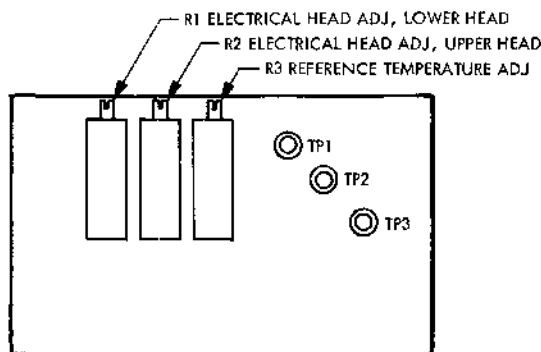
System Compensation PCBA, Test Point and Connector Placement
